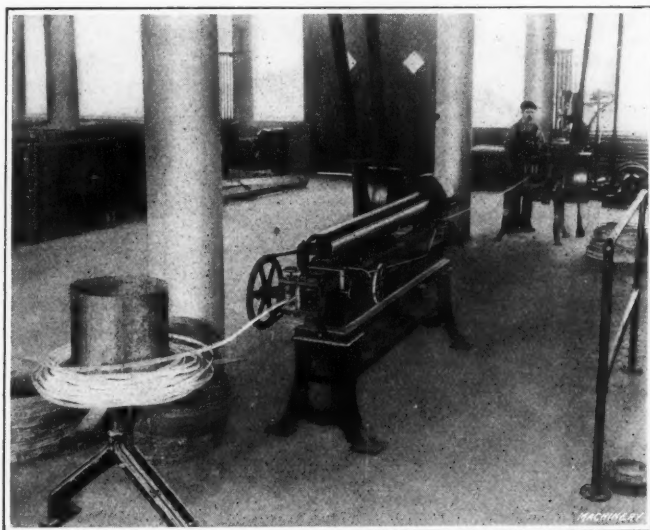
Patented Straightening Machine designed for Use on Flat Stock
